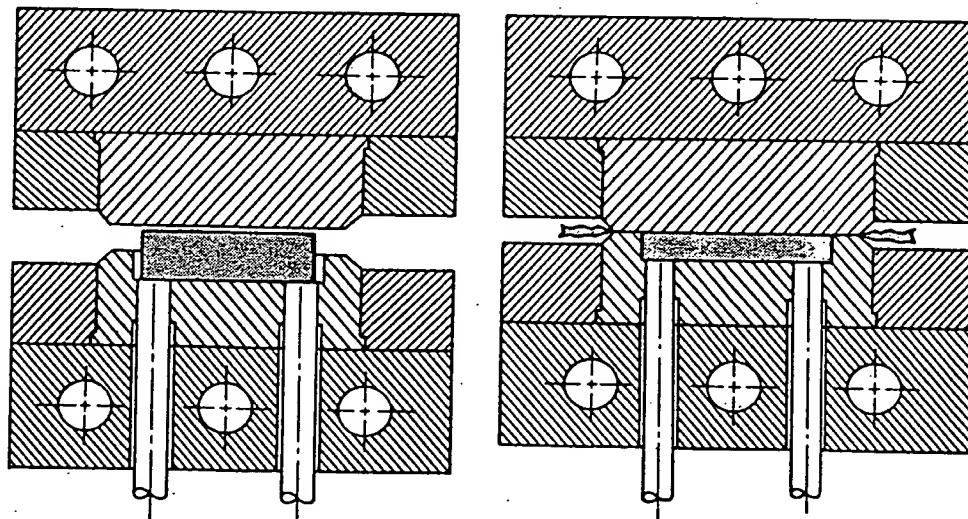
Compression mold. Open mold with preformed powder shown at left. Molded specimen and flash shown in closed mold at right.
